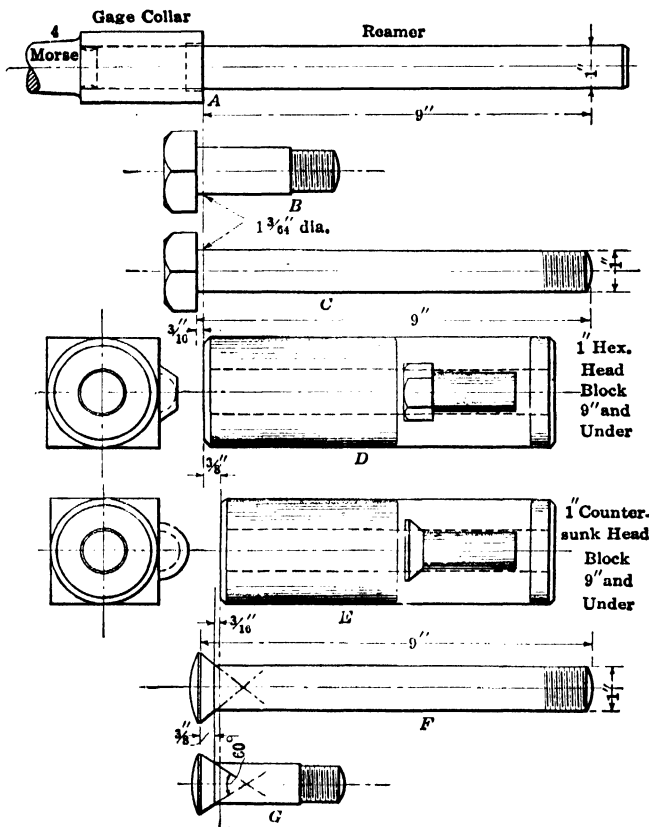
The Baldwin Locomotive Works standard taper bolt system.
